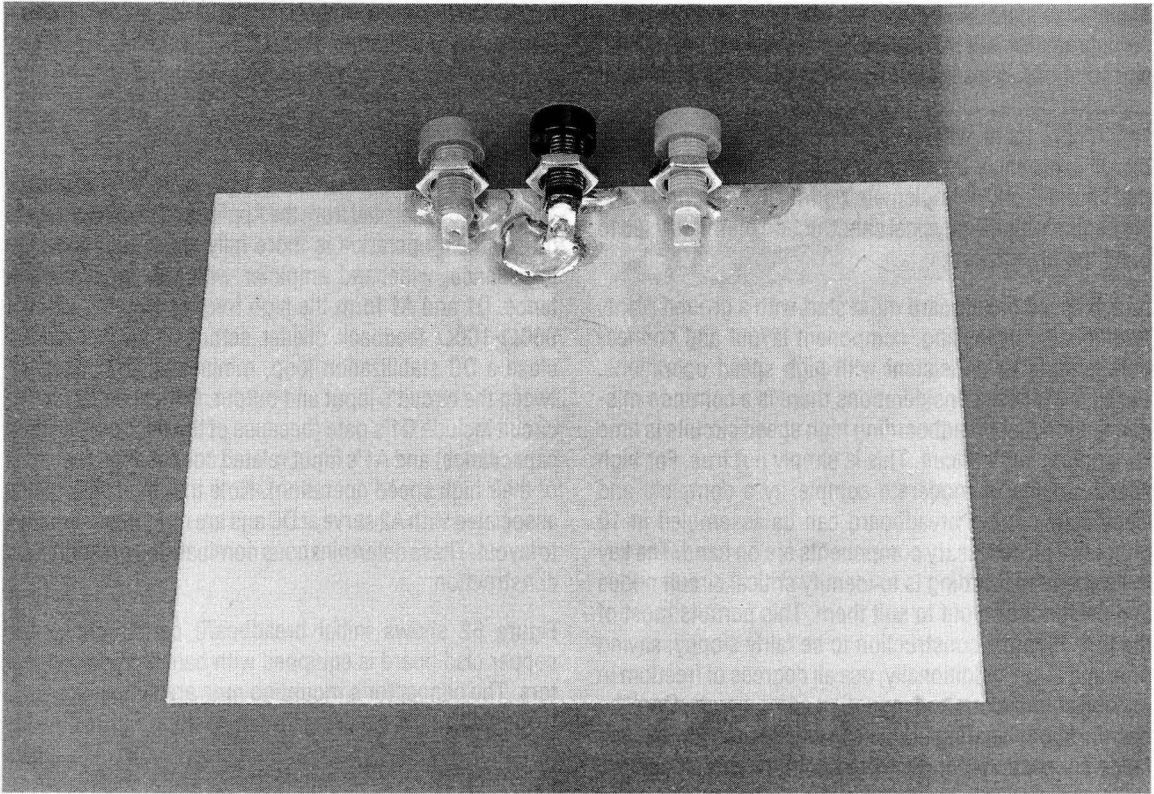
The Banana Jacks are Soldered to the Copper Clad Board
